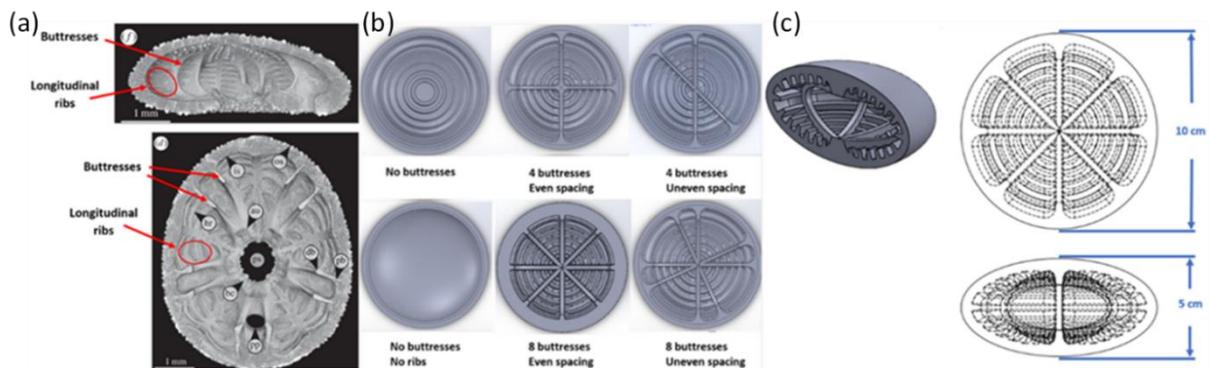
Design: (a) internal support [1]; (b) cross-section cut; (c) overall dimensions
